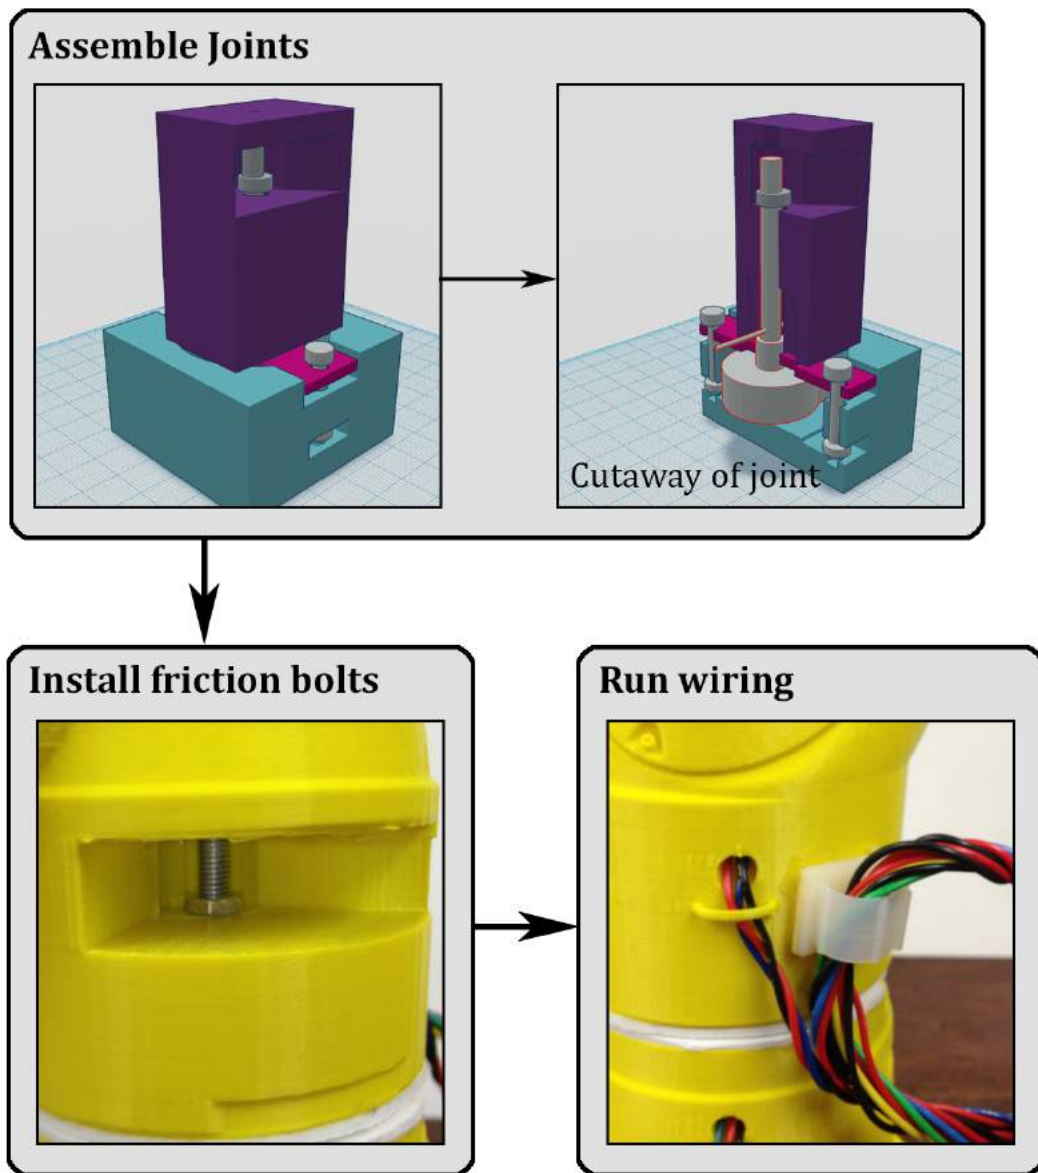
Installing the joint assemblies and friction control bolts in the printed model.
